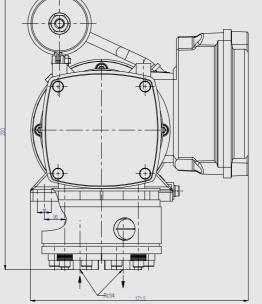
/11 Corrosion-resistant sample gas pump, explosion-proof version
